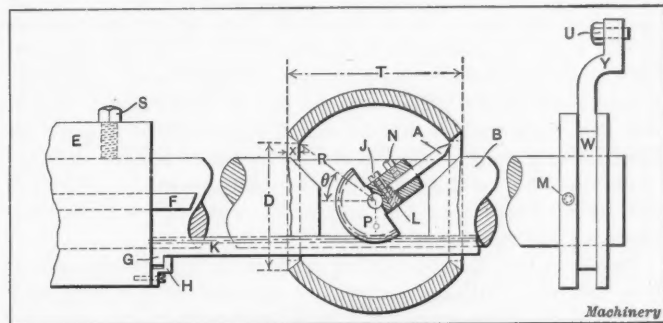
Cross-sectional View through Spherical Boring-bar and Work
